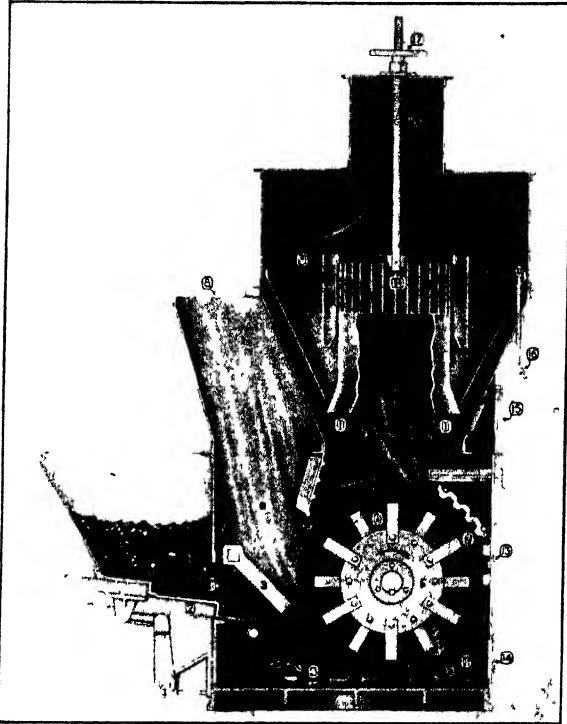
Unipulvo mill. (*Strong-Scott Manufacturing Co.*)
